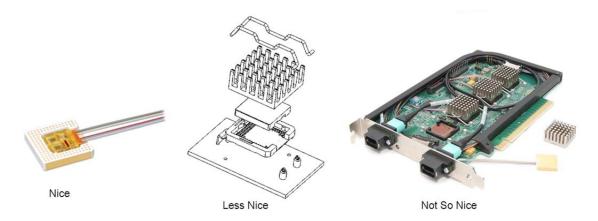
Bare Engine, Engine with Retaining Hardware, Engine on Board (source: Samtec/Aprius)
